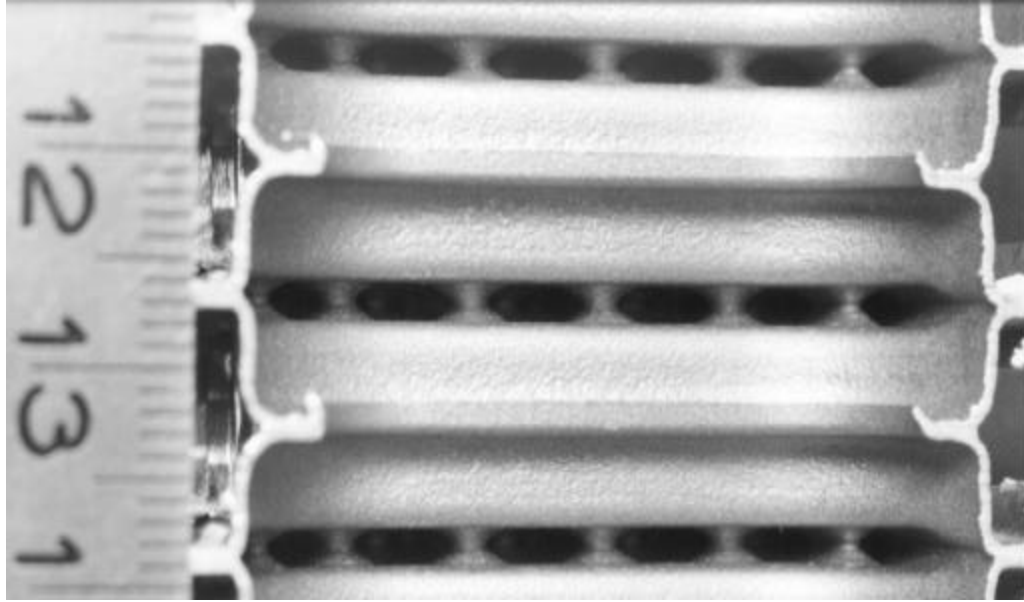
Cross-sectional view of a plate heat exchanger used in automobile applications showing “hourglass” shaped cylinders. Cross section made at header location. Ruler graduations at side in millimeters.
